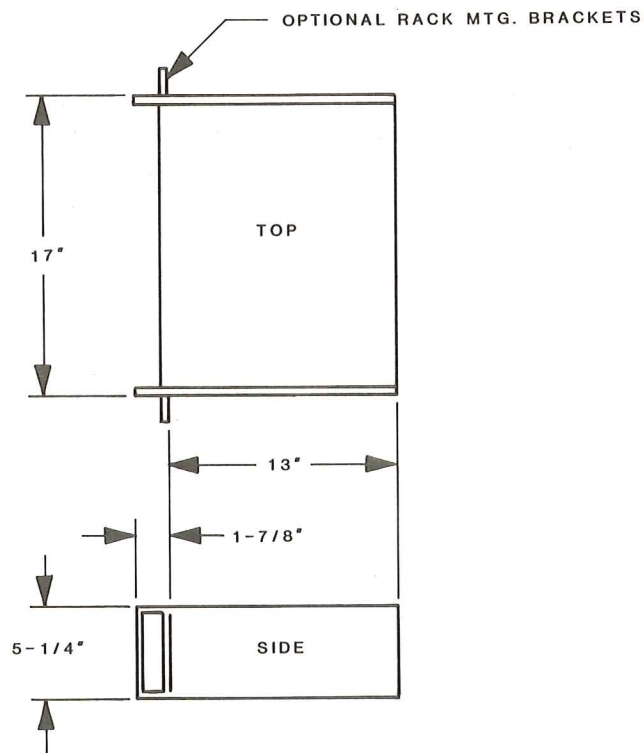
OUTLINE DIMENSIONS, AILTECH 7175
